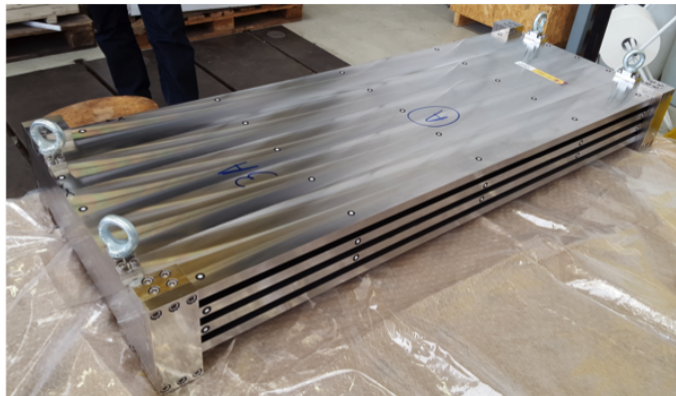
A prototype of an SDHCAL mechanical structure assembled using the electron beam welding technique.
